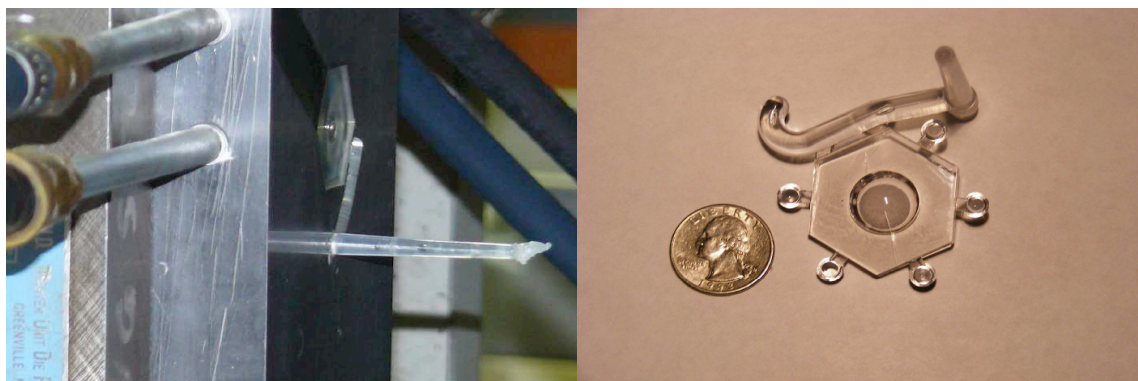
A hexagonal injection molded dimpled tile (right) produced with the injection mold die (left).
